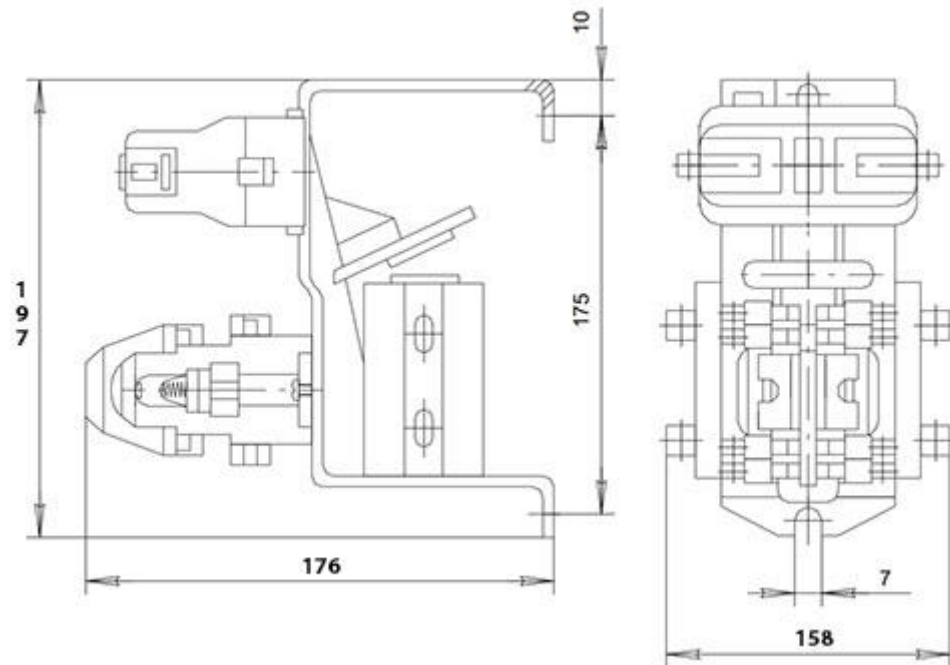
Assembly drawing of the electromagnetic MK4-10 160A 220V DC contactor [45]
